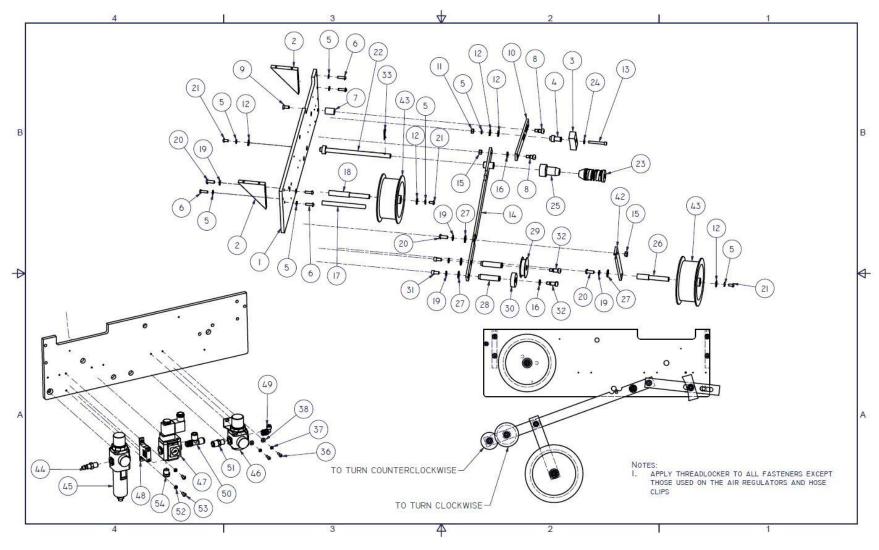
Drawing – Payout Assembly (HD Payout)
